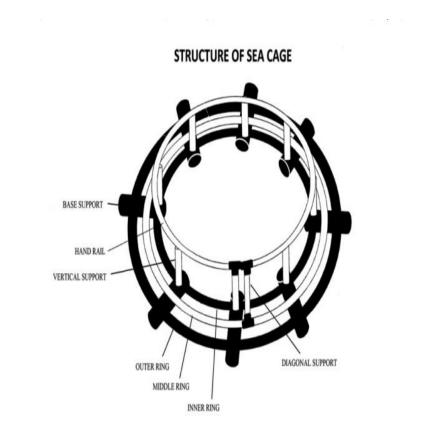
Plan View of HDPE Sea Cage Frame - Collar Rings and Handrail
